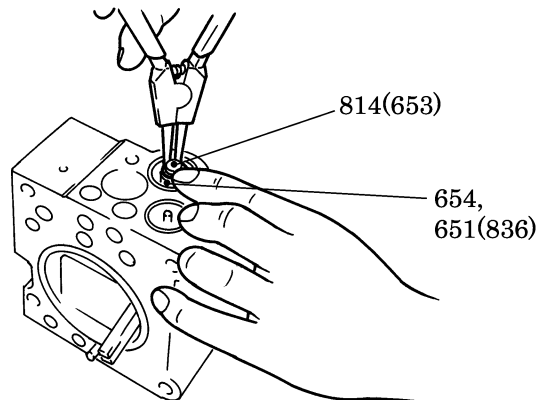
Removing spring seat (653), return spring (654) and sleeve (651)
